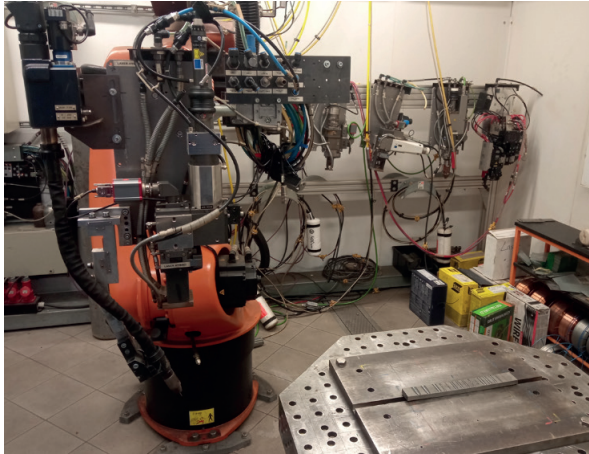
Robotic welding station equipped with a disc laser TruDisk 12002
